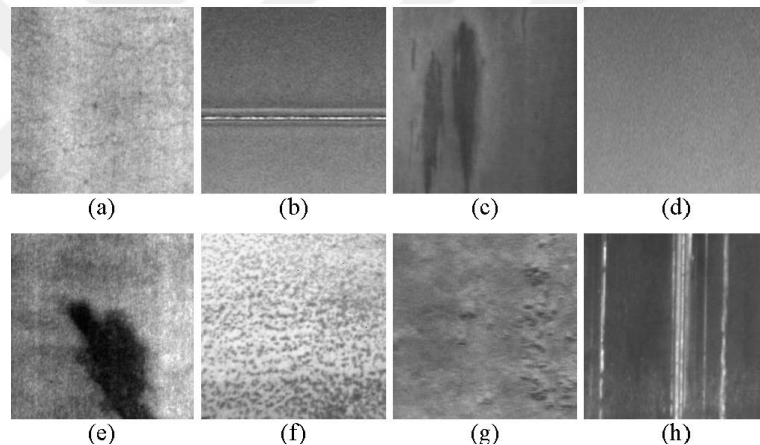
Examples of surface defects (a) crazeing, b) folding, c) inclusion, d) original, e) patch, f) pitted surface, g) rolled-in scale, h) scratch) [27]
